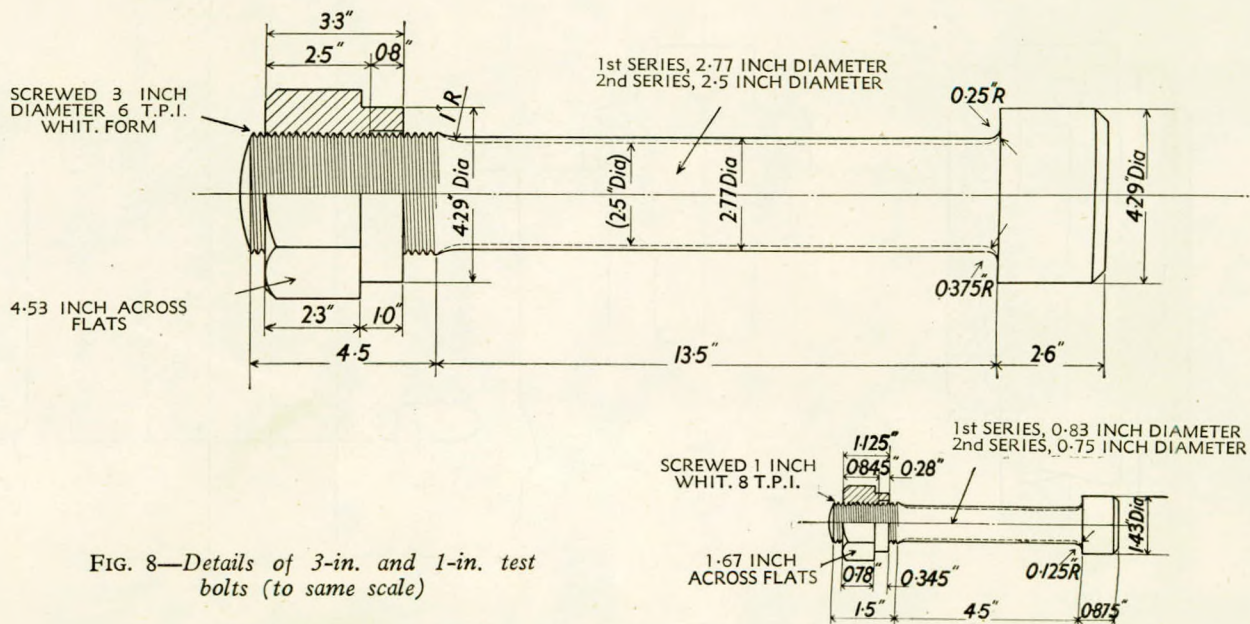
Details of 3-in. and 1-in. test bolts (to same scale)
